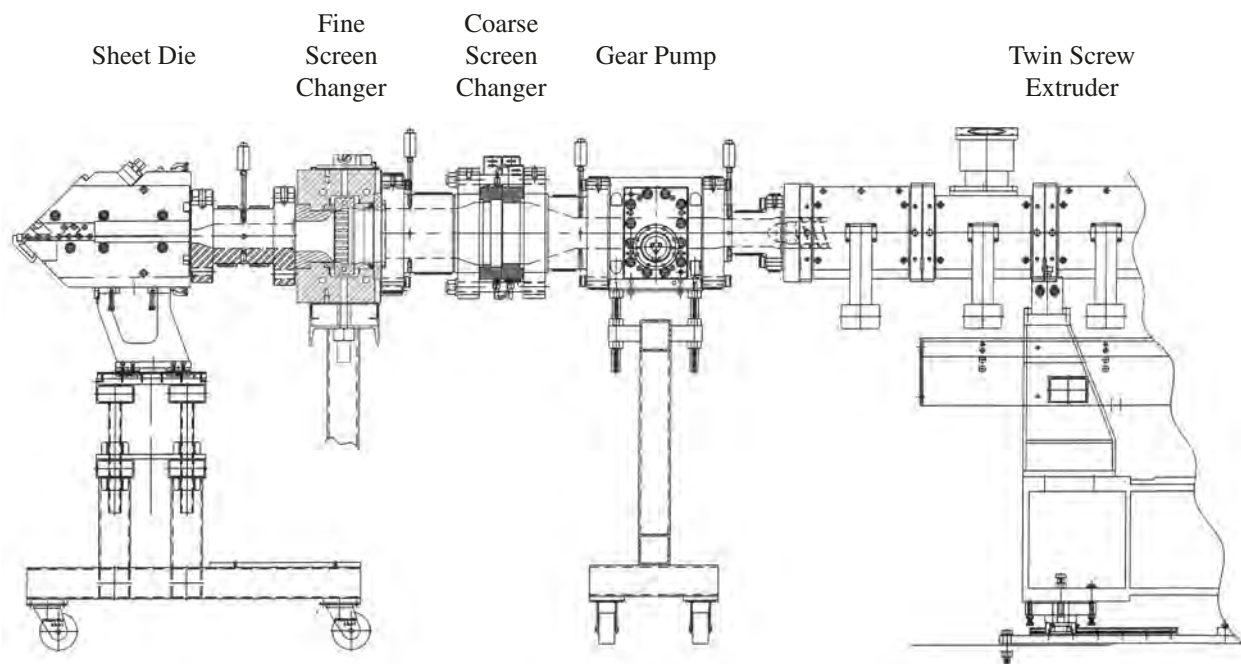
Direct sheet extrusion front-end assembly with gear pump and multi-stage filtration
